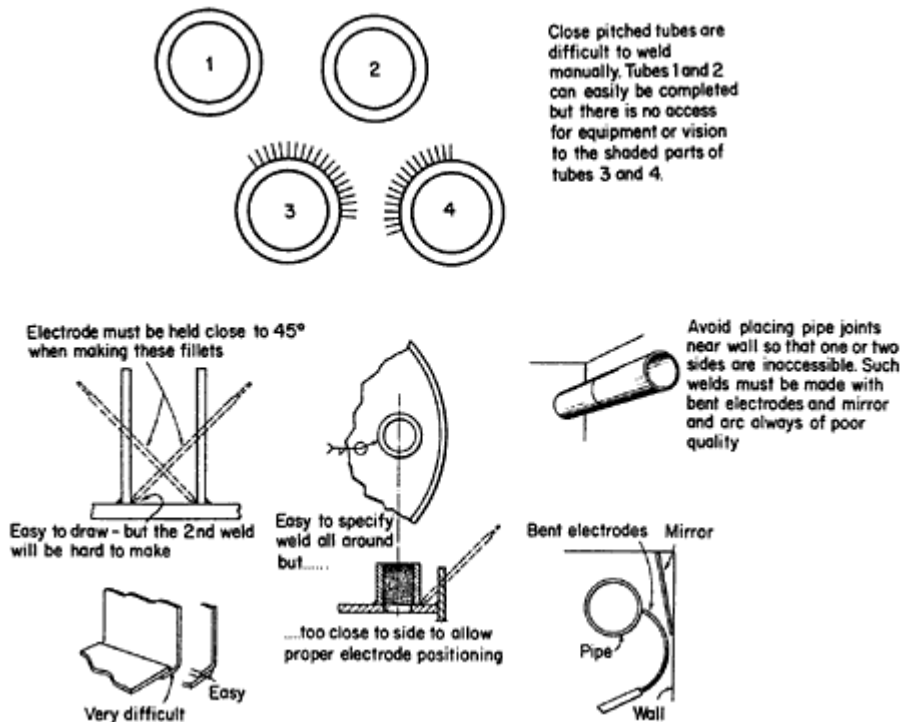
Some examples of poor access for manual welding resulting from design requirements. (After Lincoln Electric Co. Ltd, Welding Handbook.)
